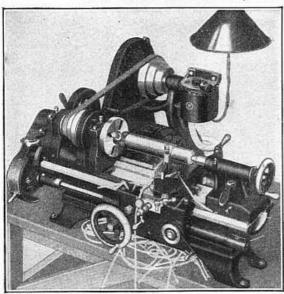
Front View of Self-Contained Motor Drive Bench Lathe Unit
